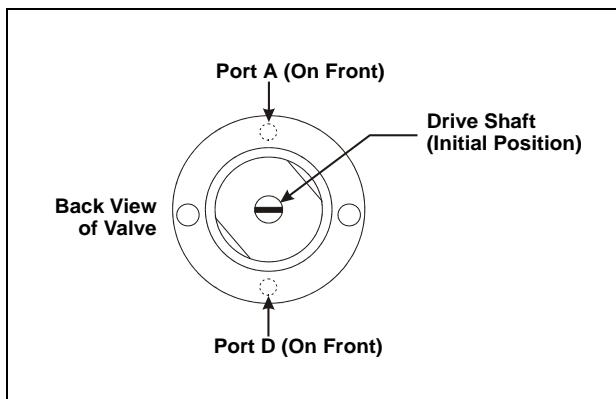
Sample Syringe Drive Shaft Initial Position
